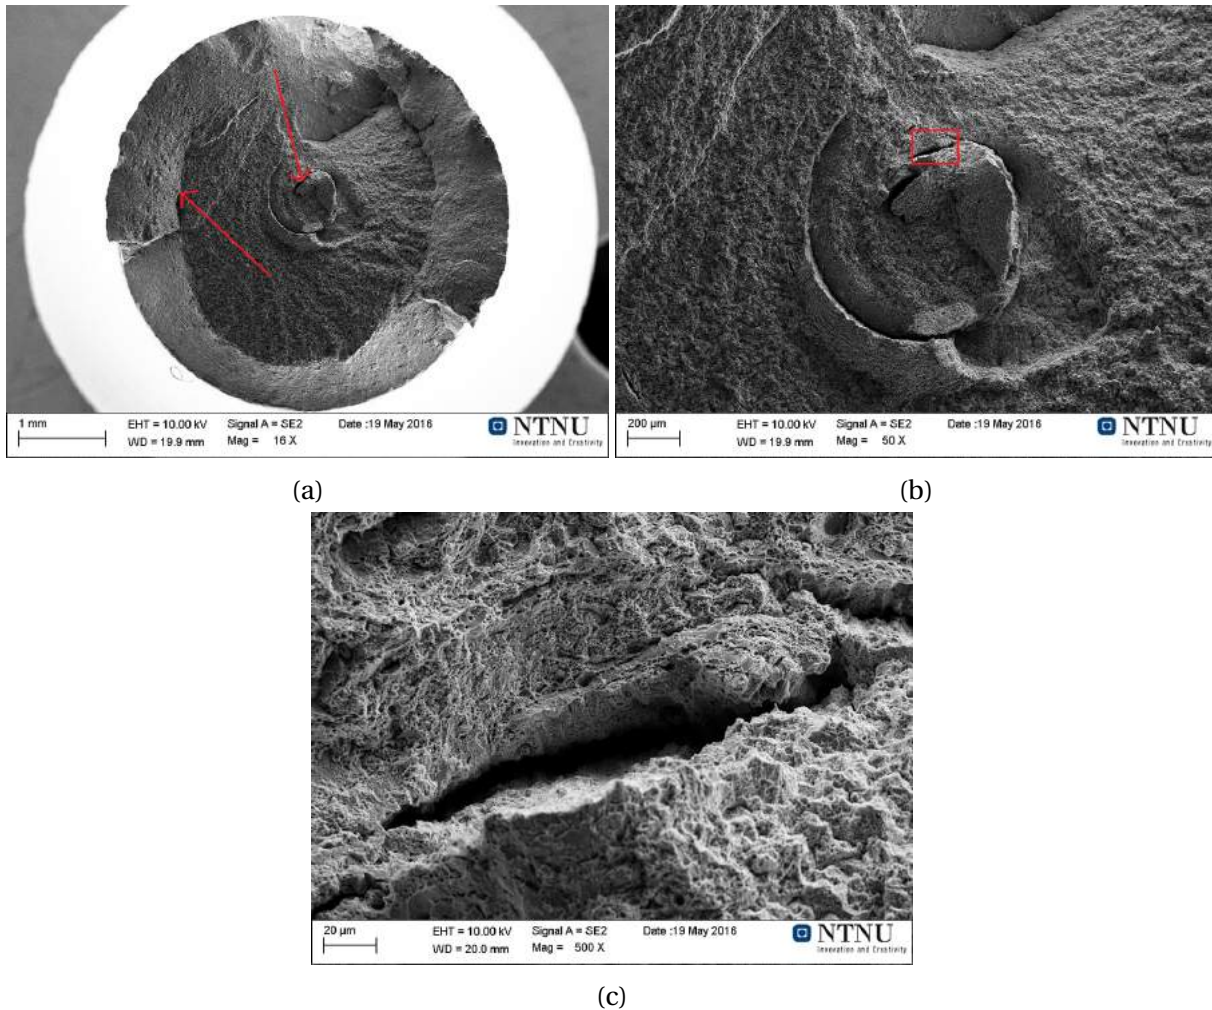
Fracture surface of Al-10%Mg screw extruded machined granulates.
